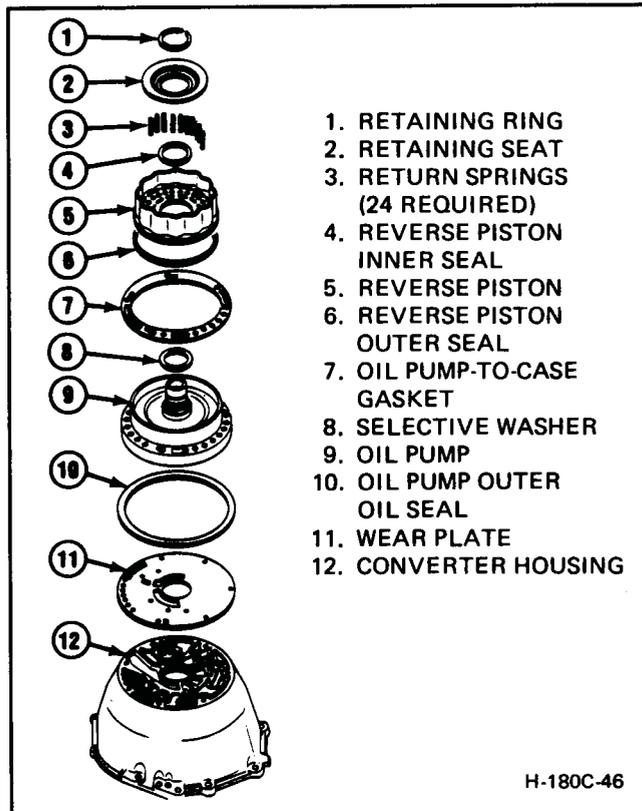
C-58 Exploded View of Converter Housing, Oil Pump and Reverse Clutch
